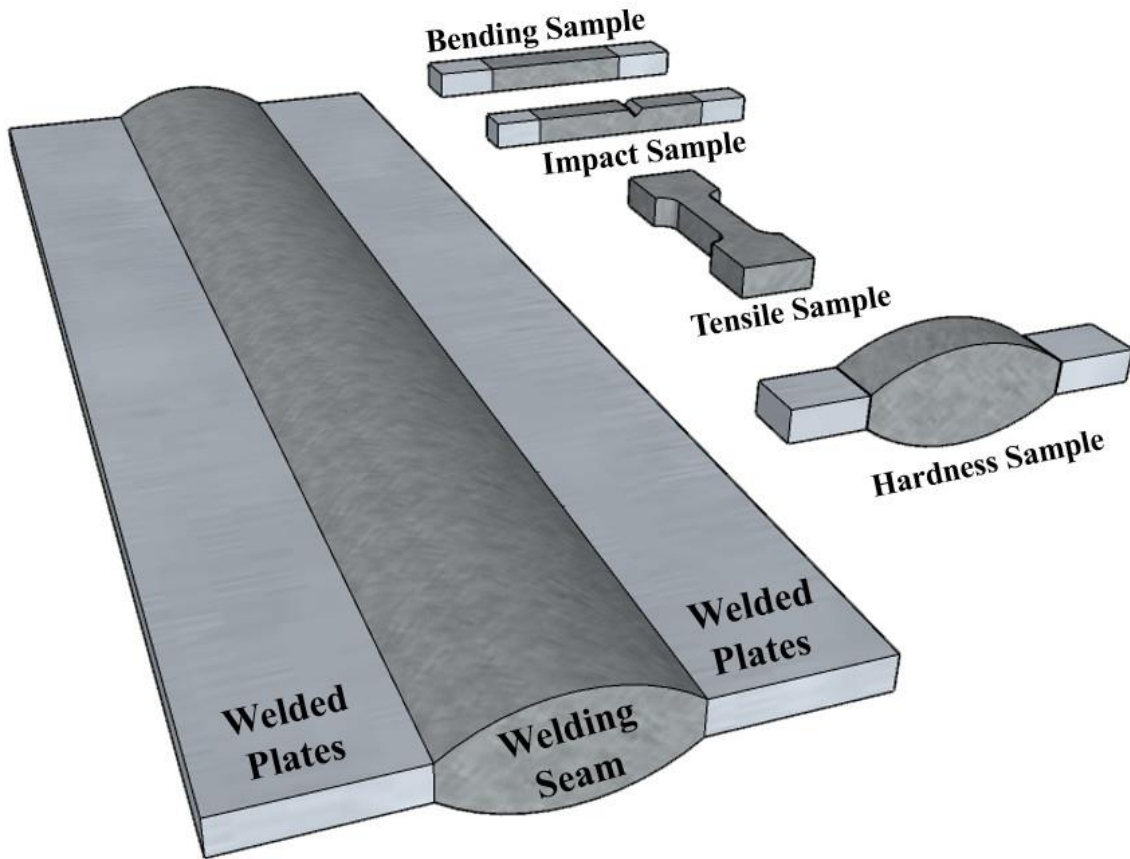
Schematic illustrations of test samples removed from welded plates.
